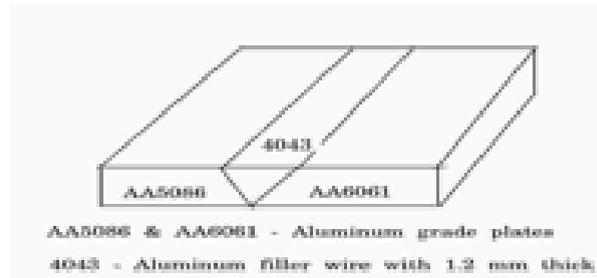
Layout of weld for joining two dissimilar aluminium grade materials
